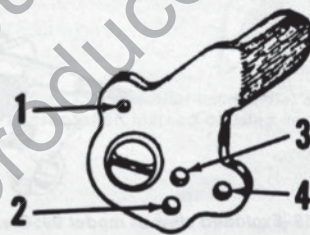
View showing throttle shaft arm typical of all carburetors except for models 995D and 995G. It is important that throttle opening or governor spring and/or link be hooked into proper hole. Refer also to Fig. HL202 and Figs. HL210 through HL213.
